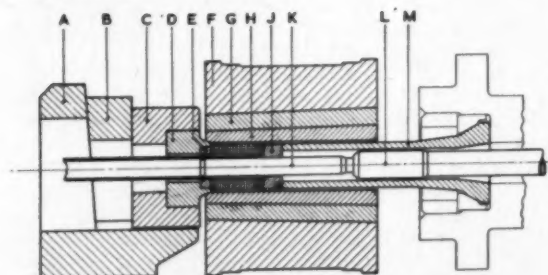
Arrangement of typical container assembly for use with horizontal extrusion press
